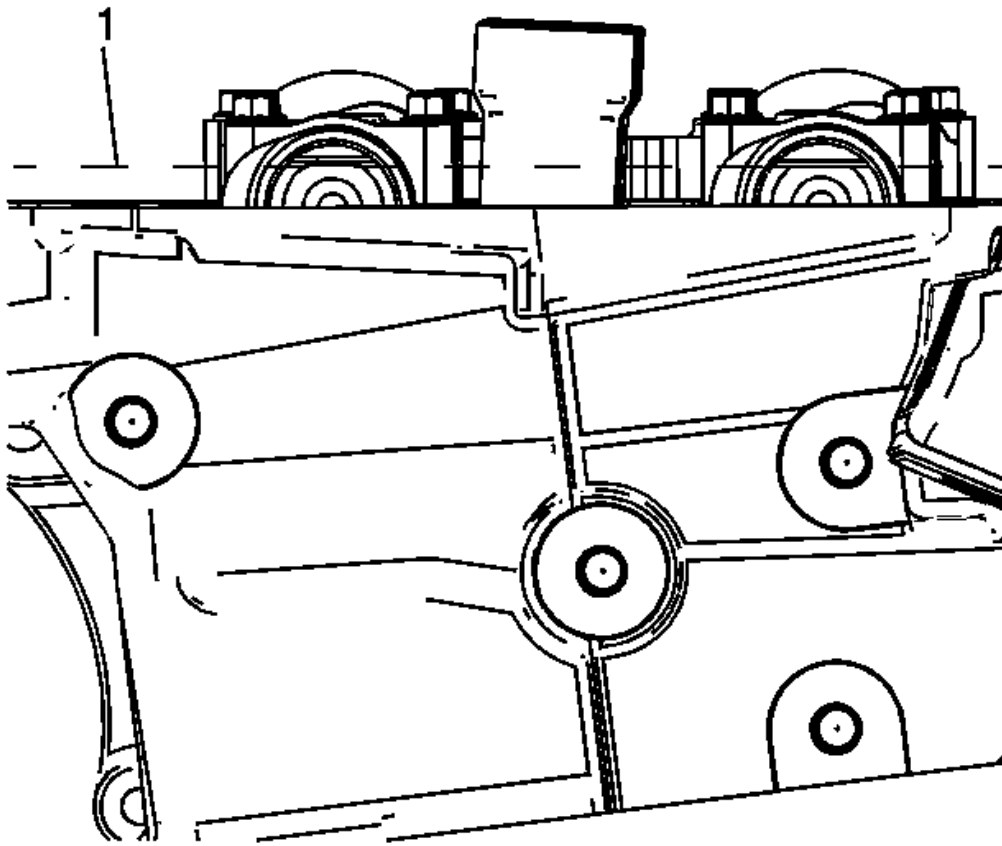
Camshaft Flats Parallel With Camshaft Cover Rail
